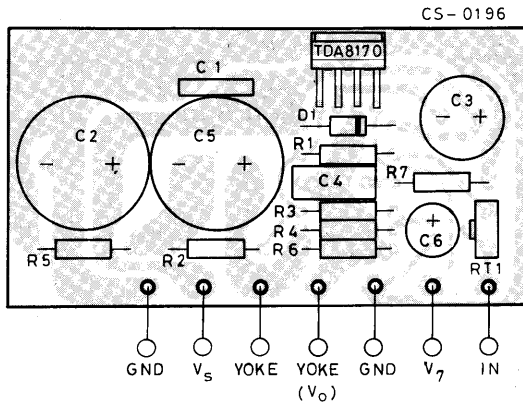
PC board and component layout of the circuit of fig. 2 (1:1 scale)
